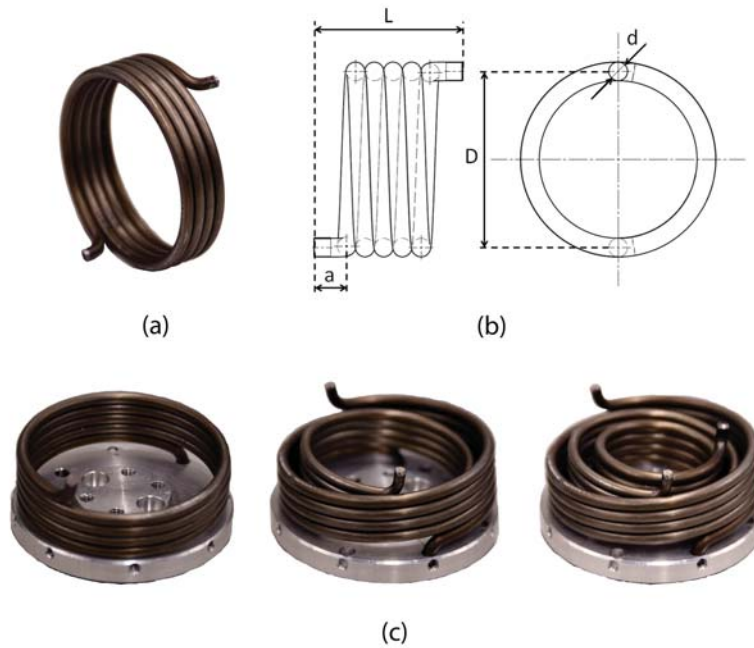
The designed torsion spring: (a) Prototype of torsion spring, (b) Dimensions of torsion spring, and (c) Different combination of torsion springs.
